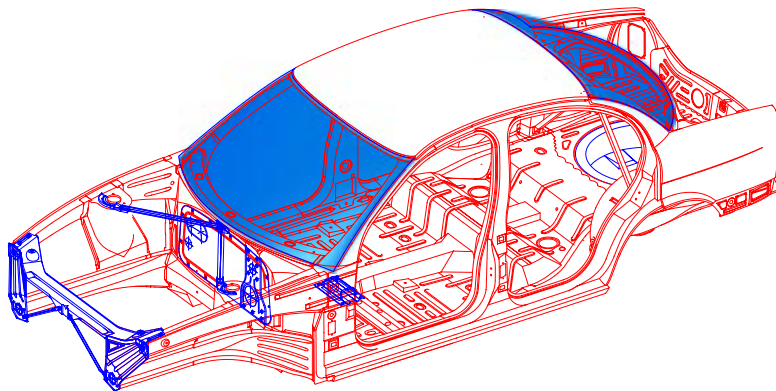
DH with Bonded / Bolted Parts
